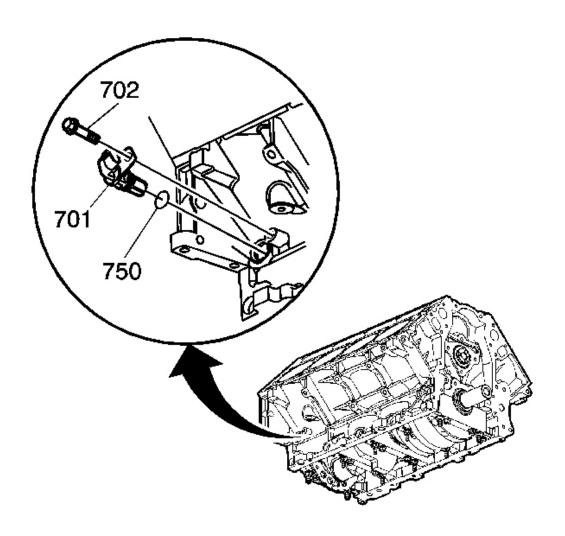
CKP Sensor, Bolt & O-Ring Courtesy of GENERAL MOTORS CORP.
